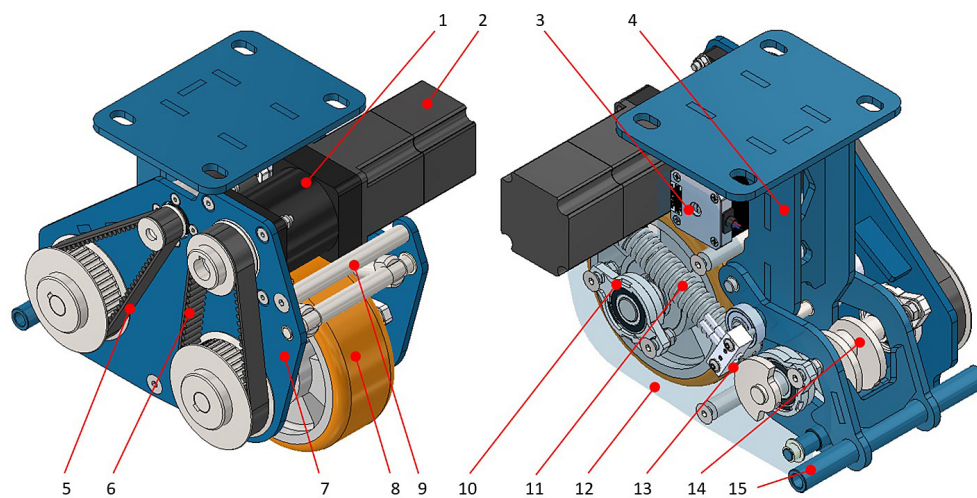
Power-assist drive unit (PADU) for intralogistics equipment: 1 – planetary gear reducer, 2 – BLDC motor (wheel drive), 3 – BLDC motor (up/down drive) with planetary gear reducer, 4 – fork with mounting plate, 5 – belt transmission (up/down), 6 – belt transmission (wheel), 7 – left body, 8 – wheel, 9 – horizontal coupler, 10 – block bearing, 11 – spring, 12 – right body (transparent view), 13 – inductive sensors and cam, 14 – camshaft, 15 – handle (up/down manual operation)
